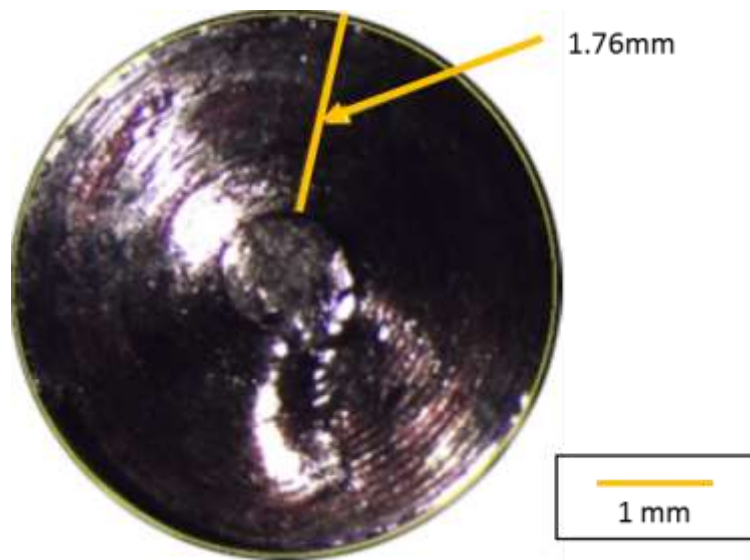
Optical images of cut surfaces using the pipe-cutter technique
